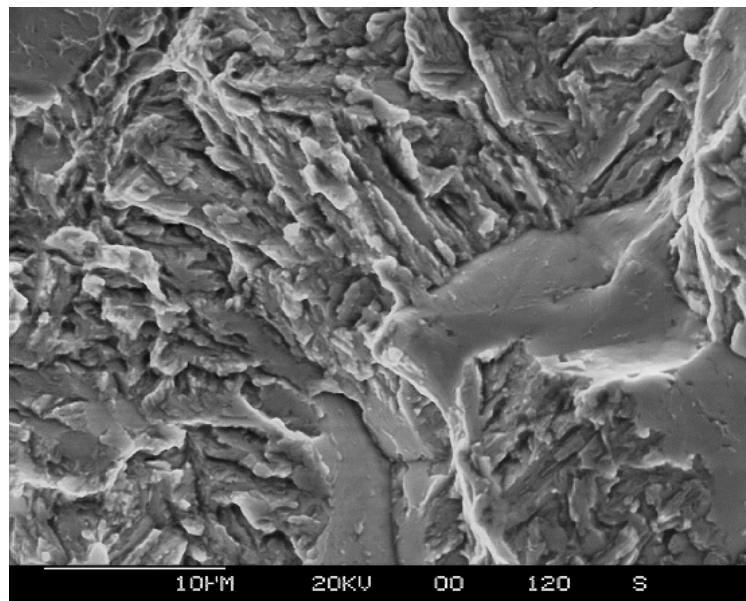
Fracture surface for cadmium plated 300M specimens (Arrow shows the point of crack initiation).
